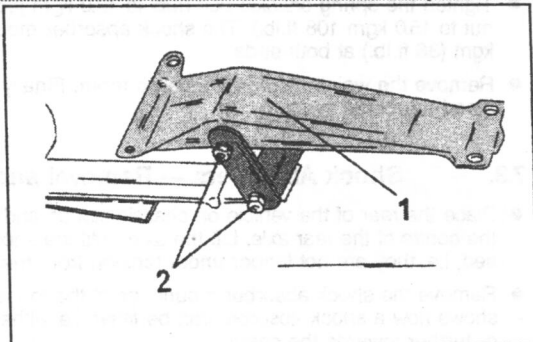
The rear spring mounting bracket (1) and the spring shackle mounting (2).
